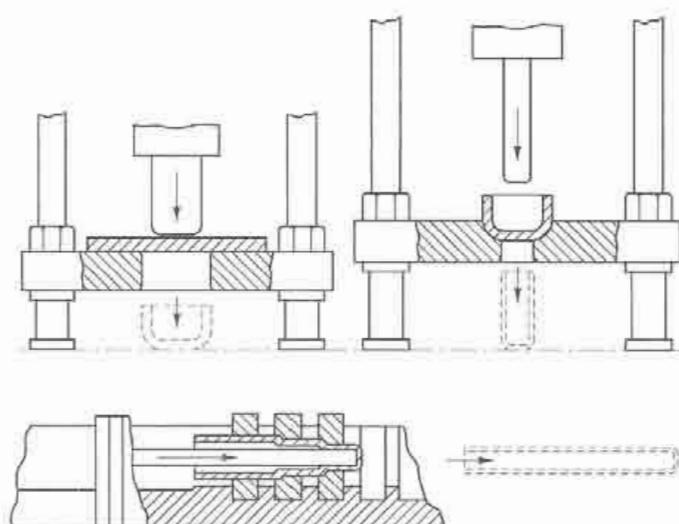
Methods of hot drawing a cup-shaped part. (Upper left) First draw. (Upper right) Redraw operation. (Lower) Multiple-die drawing. (Courtesy of United States Steel Corp., Pittsburgh, PA.)
